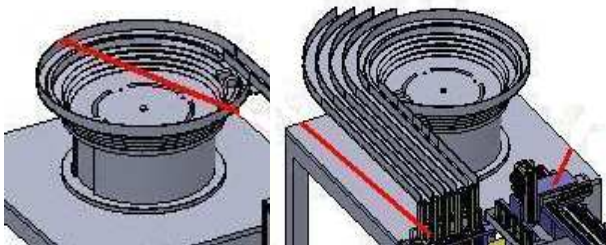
(left) Clamp body loading station (right) Roller loading station
